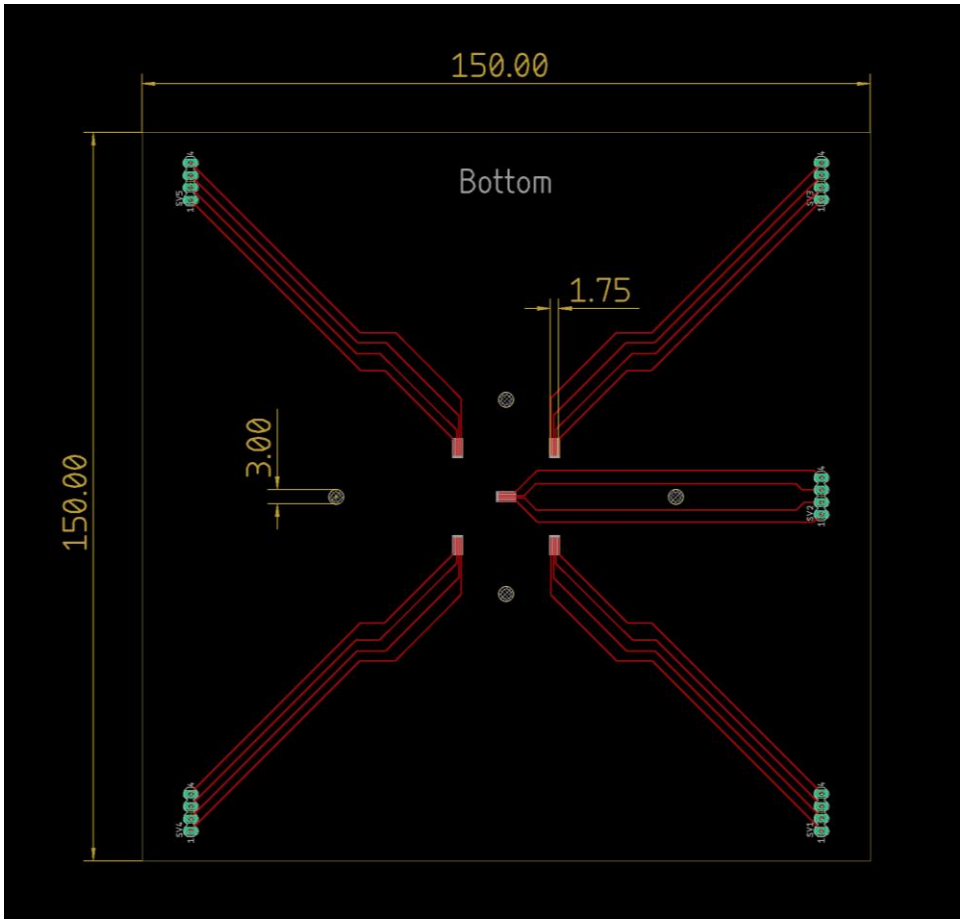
PCB Layout of bottom probe with in red the top copper
